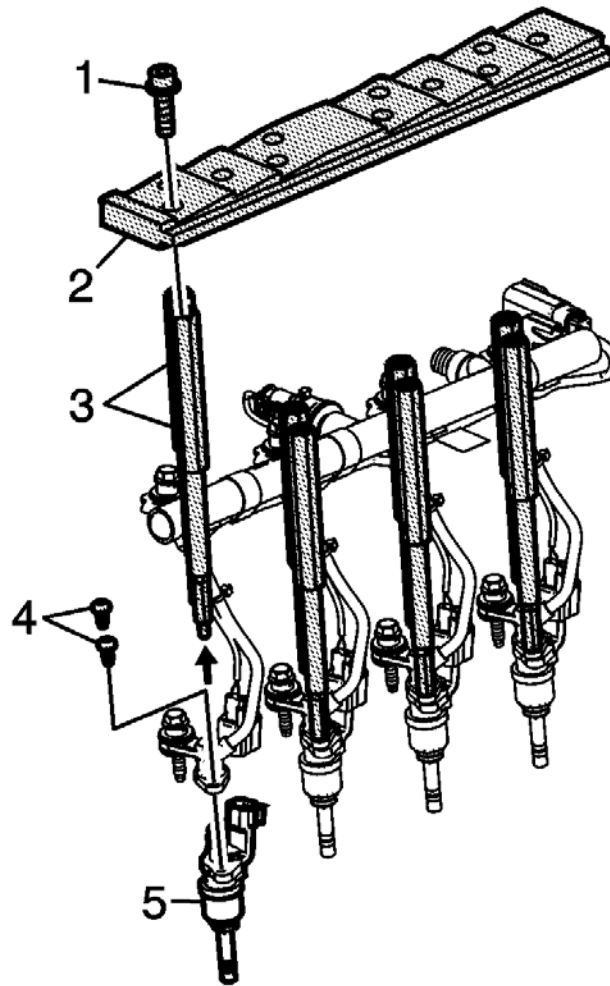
Installing Fuel Injectors Using Removal/Installation Kit
